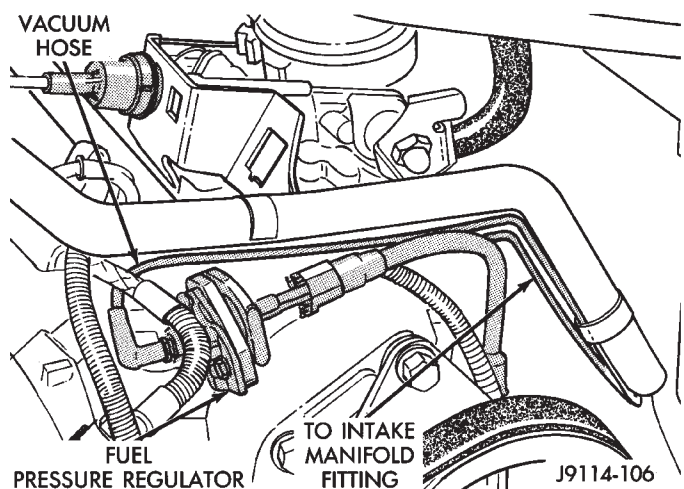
Pressure Regulator Vacuum Hose—2.5L Engine
